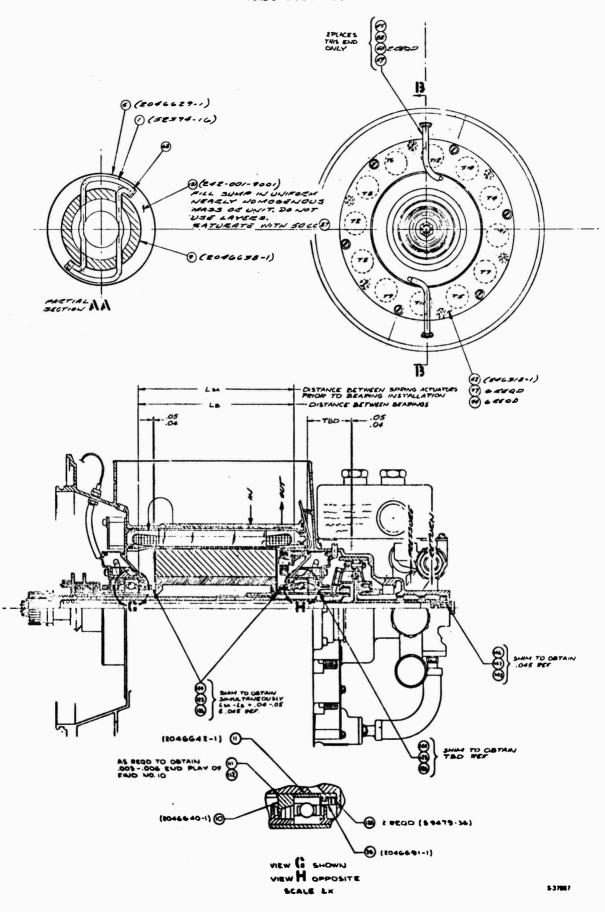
270 VDC Generator Assembly, PN 518989-1 (Sheet 2)
